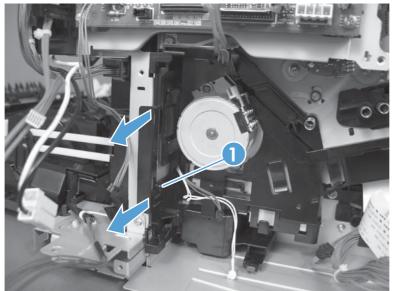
Remove the cassette pickup drive assembly (6 of 10)
